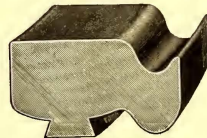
SECTION OF PLANED FACE ON FIRST APPLICATION
